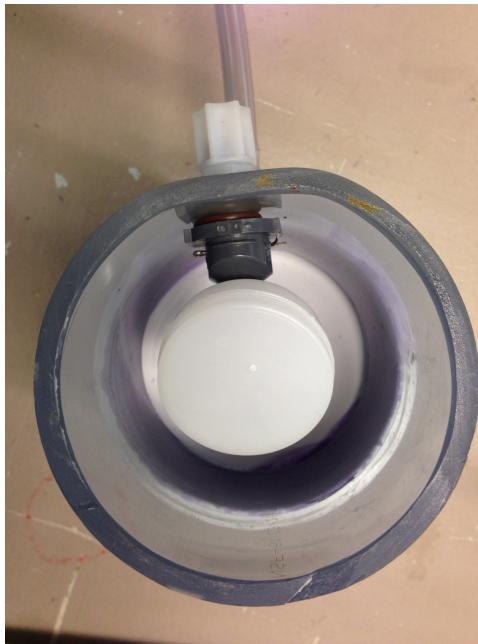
This photo shows the flattened portion of the outer tubing. This was done in order to increase the contact between the fitting and the wall. During the fabrication process, the team used a PVC welder to heat up the PVC pipe. However, this molding step can also be done without a PVC welder. PVC molding is currently done in Honduras by heating up the PVC in vegetable oil and the molding the shape.
